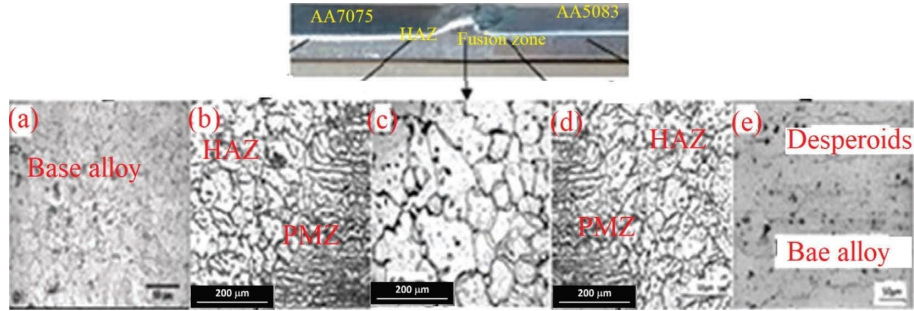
Macrosection of weld joint fabricated at 100 amp.
